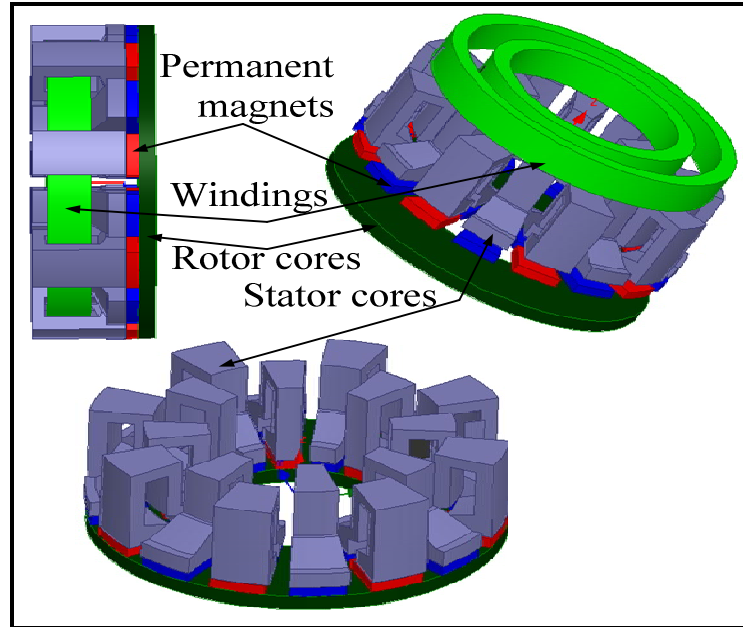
Scheme of second design PMTF machines designed.
